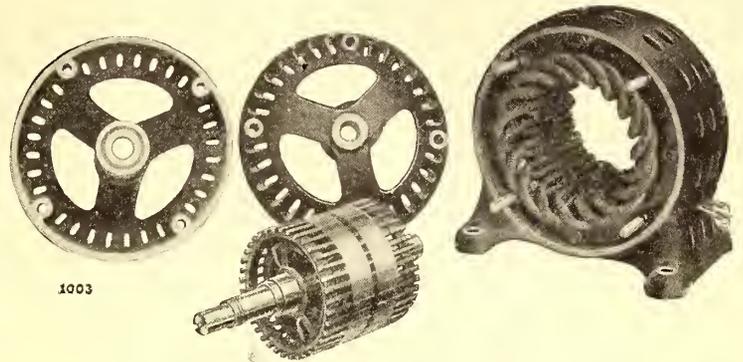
PARTS OF MOTOR READY FOR ASSEMBLING
